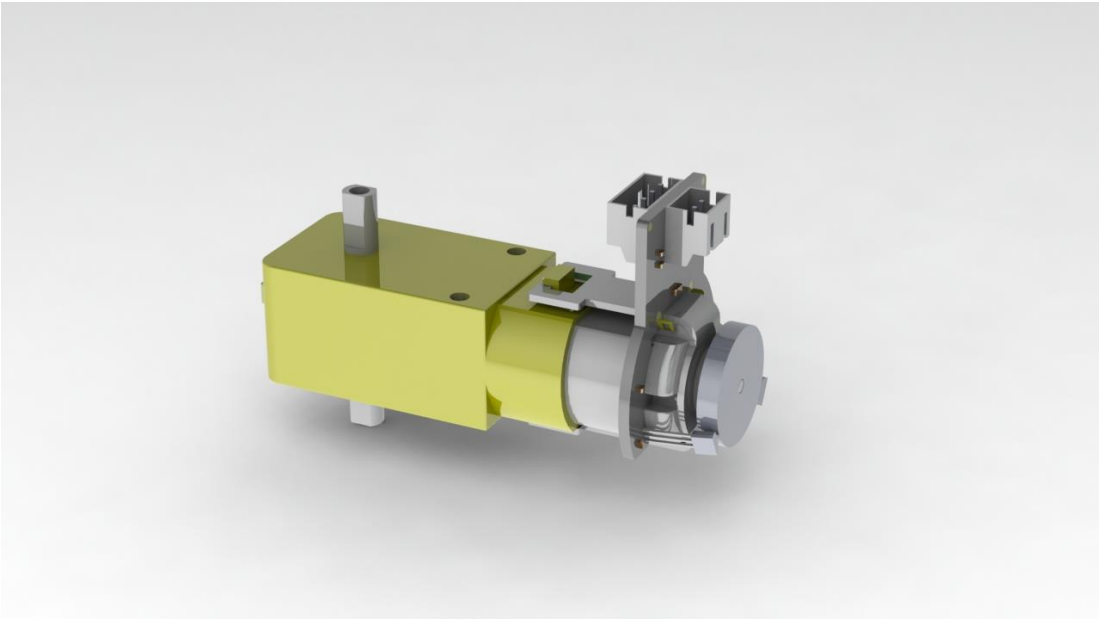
CAD rendering of the DFRobot DC gear motor with encoder.
